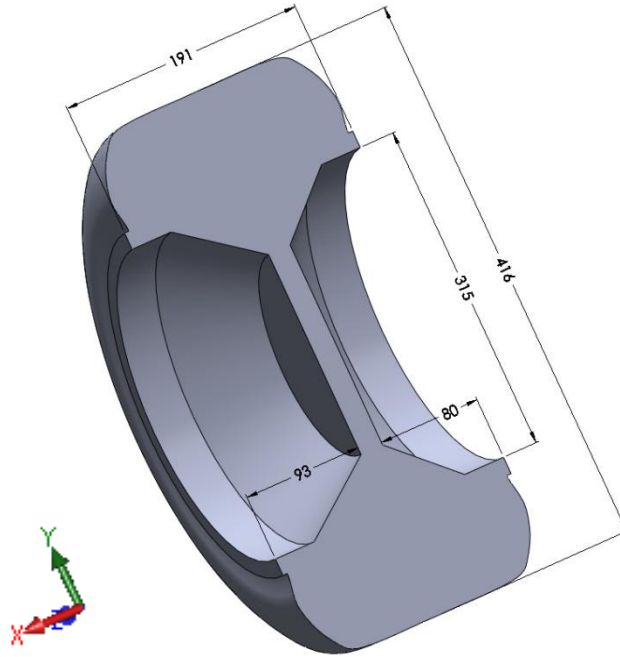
Cross-sectional view of wheel showing dimensions (mm)
